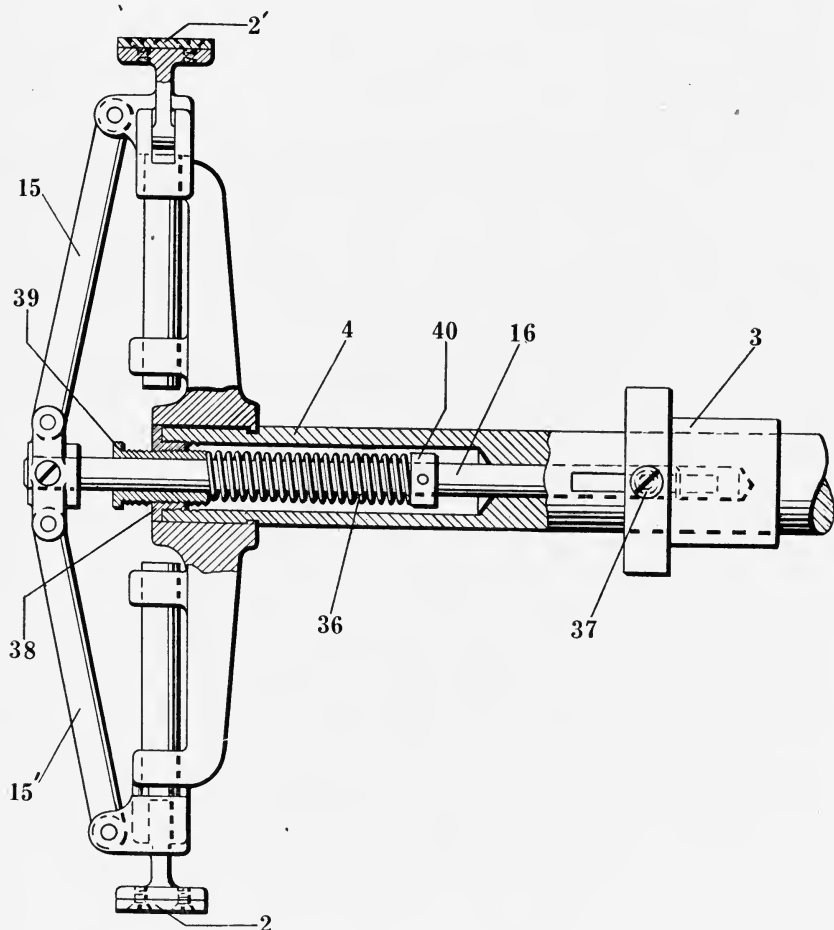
At 4 is indicated the clutch shaft upon which the flange 3 is mounted, 2 and 2' are the leather buffers; 16 is the clutch rod, which is connected to the flange 3 by the screw 37; the spring 36 bears against the collar 40 upon the rod 16 and through its pressure causes the rod to expand the buffers 2 and 2' against the inner rim of the driving pulley. The nut 39 forms a bearing for the spring 36. This nut can be turned in to increase the tension of the spring when it does not have strength enough to drive the machine through all its stresses.
